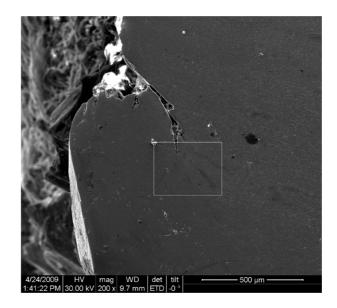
"Folding" of material observed near the fracture surface.
